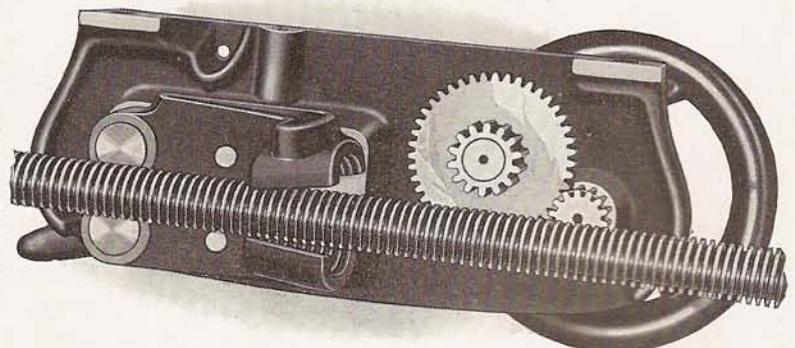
Interior View of the Apron Used on the 9-inch "Workshop" Lathe.
